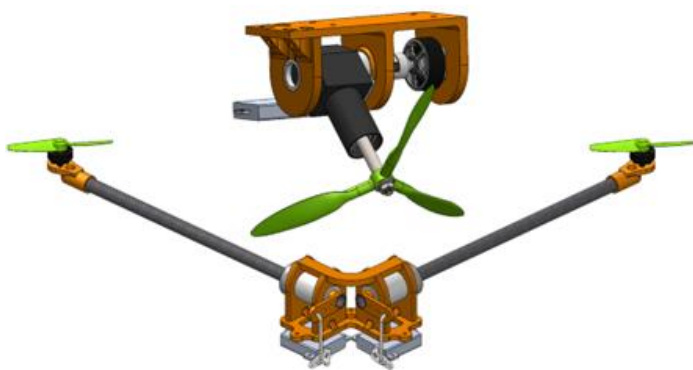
CAD models for both the rear (top) and front (bottom) rotors' tilting mechanisms.
